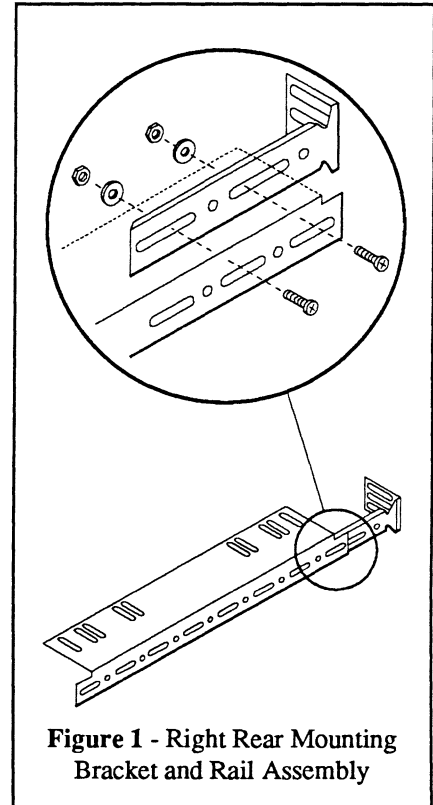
Right Rear Mounting Bracket and Rail Assembly
